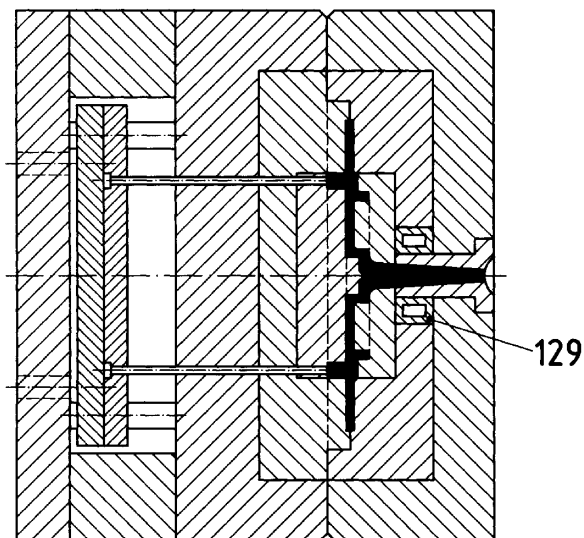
Diecasting die for hot-chamber diecasting machine
